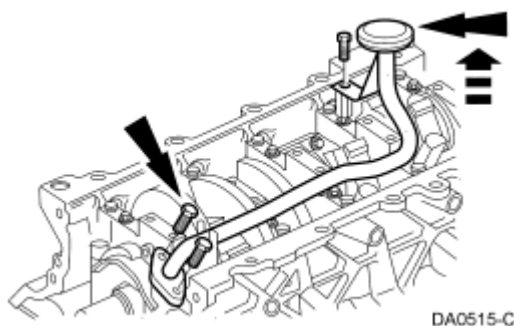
Oil Pump Screen And Pickup Tube & Bolts
